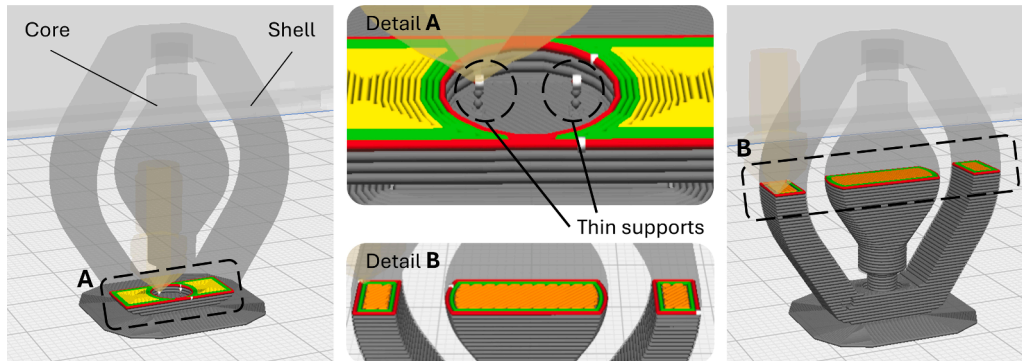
Deposition strategy used for the construction of polymer inner elements. Detail A refers to the thin supports for enabling free-rotating movement, and detail B refers to the 100 % infill zigzag paths used in the layers.
